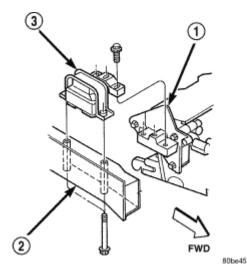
View Of Right Side Engine Mounting Courtesy of CHRYSLER LLC
